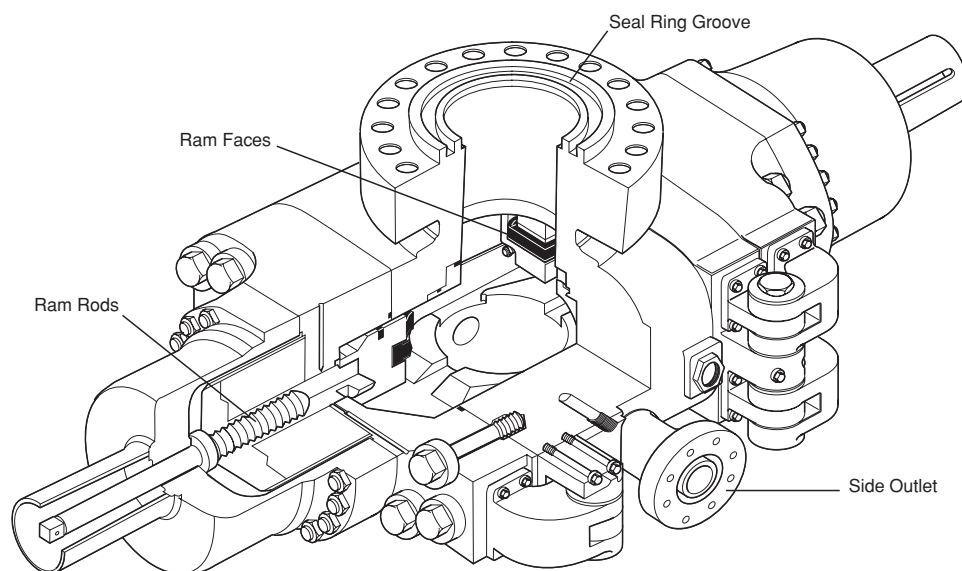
Details of ram preventer (Courtesy of Hydril*)
